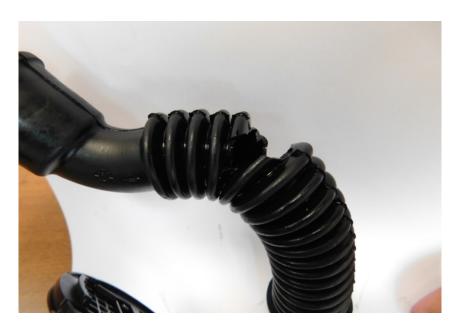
The torn hose of the oil separator breather line after its removal from the engine
